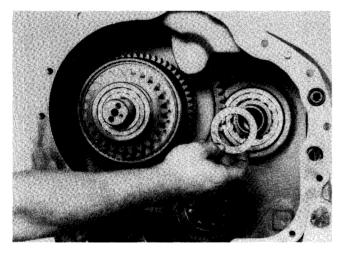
Position 2nd clutch bearing end plate on low (1st) clutch shaft.
